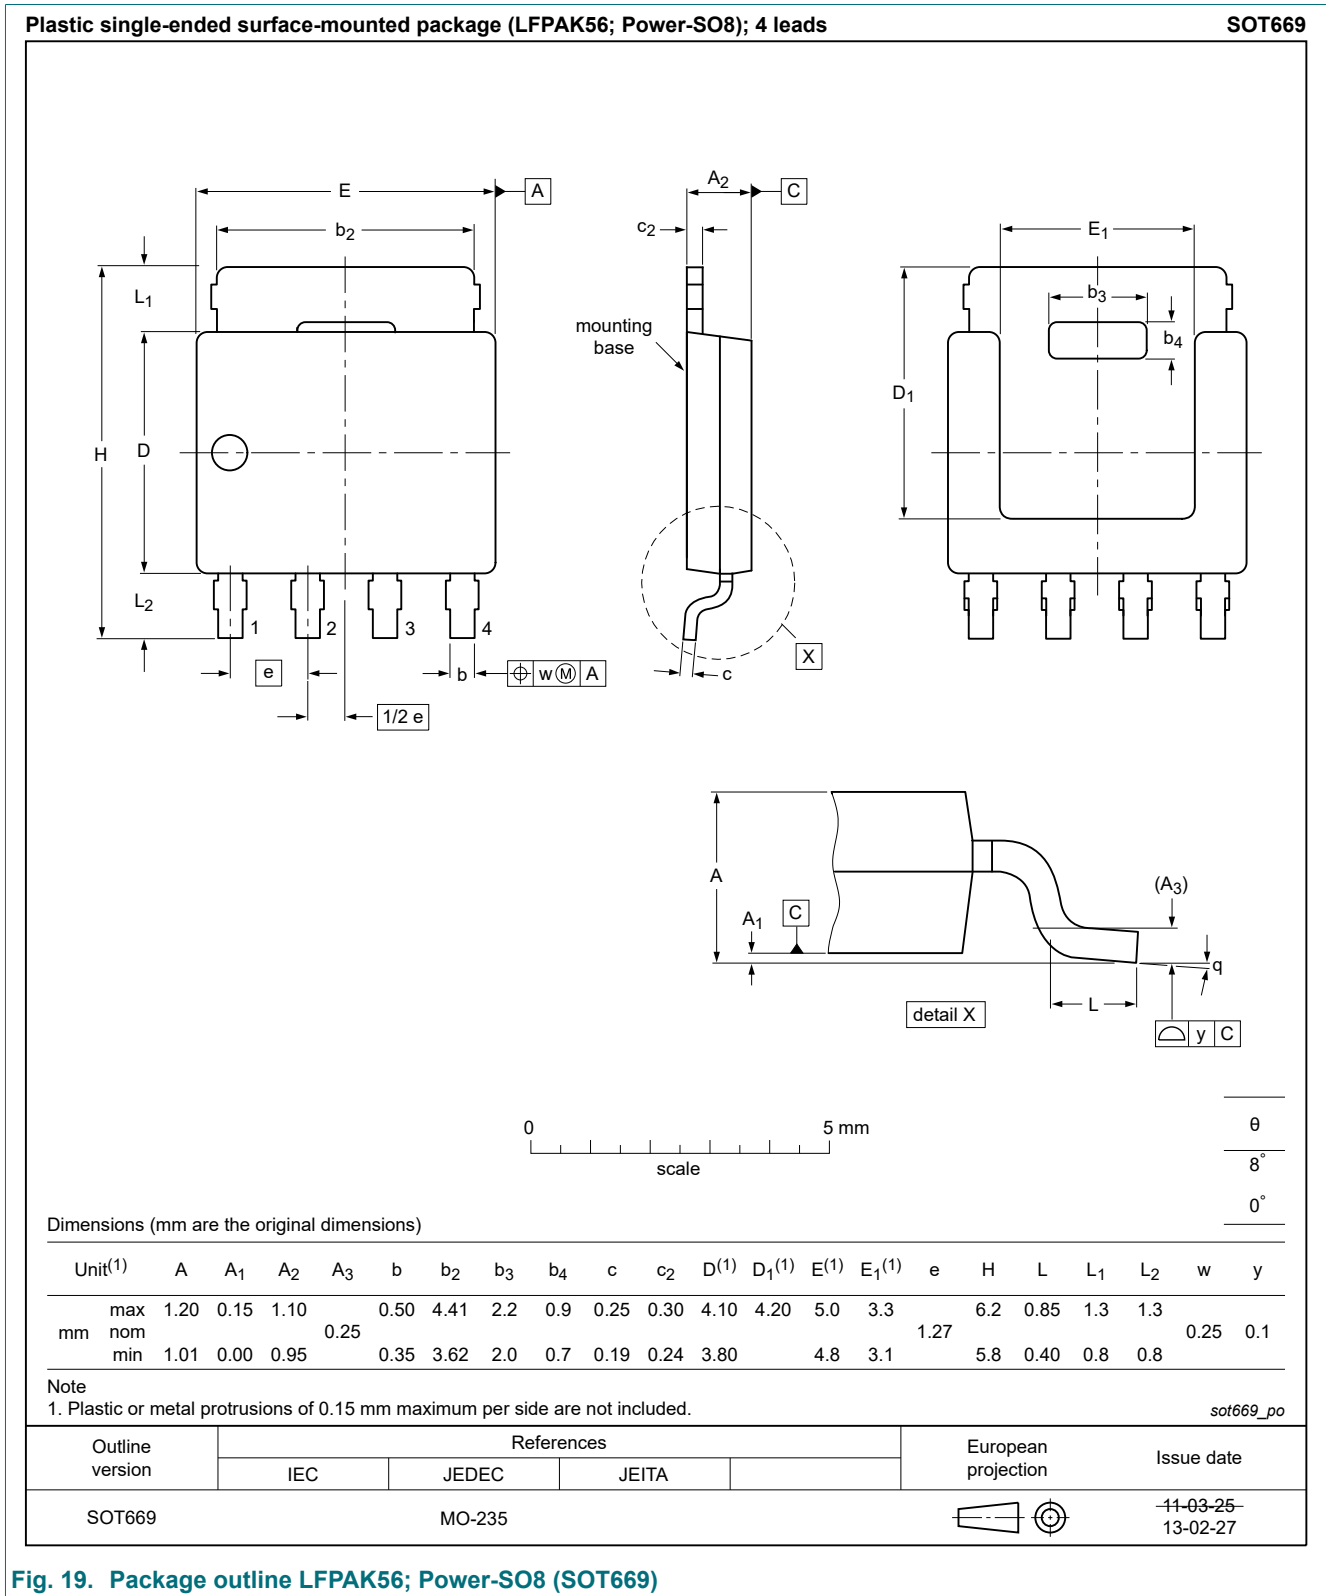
Package outline LPAK56; Power-SO8 (SOT669)
